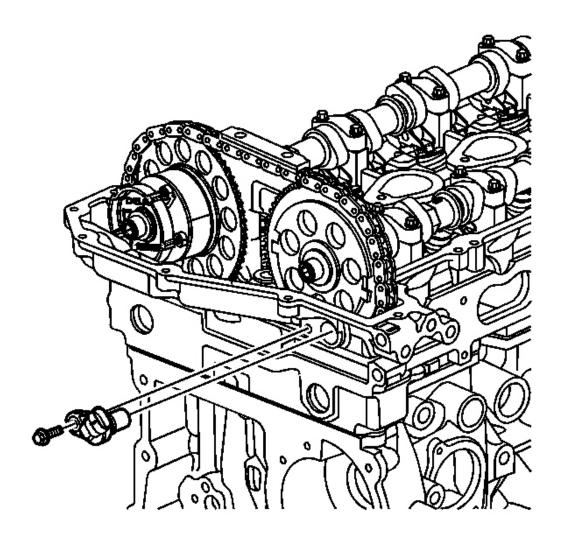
View Of Intake Camshaft Sensor Courtesy of GENERAL MOTORS CORP.
